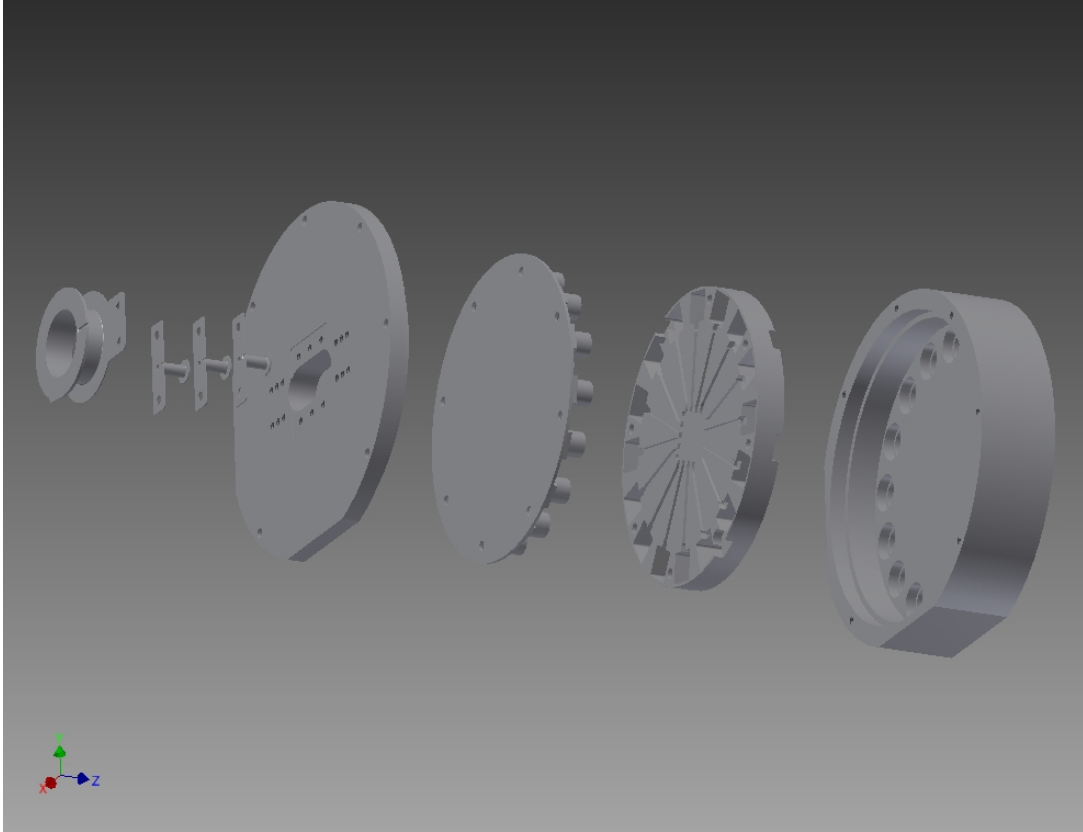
The illustrative CAD design of the sample. It is an assembly of a big coil, three parallel arranged small coils (in our first experiments only two small coils are implemented), mount, PCB, microchip (not shown in the figure), PCB cover and lid (from left to right).
